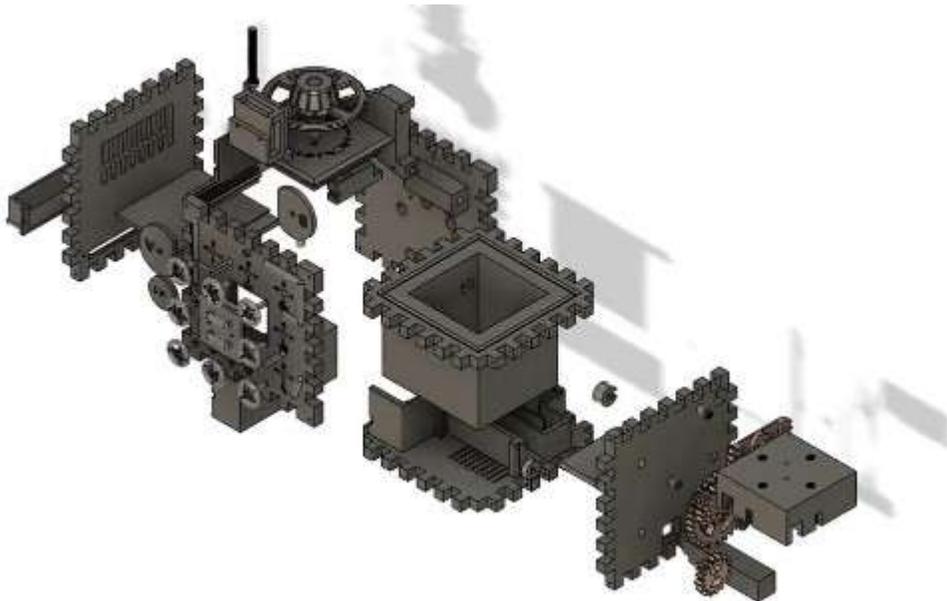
Exploded View of the Steam Turbine Puzzle Box
